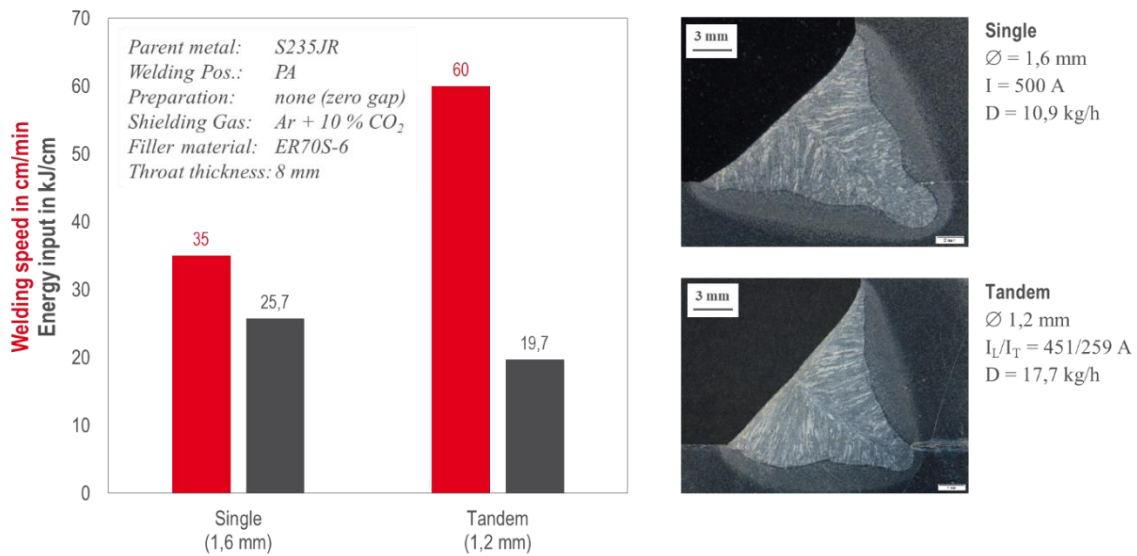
Comparing single wire with tandem welding on a fillet weld with a throat thickness of 8 mm. Both seams were welded with pulse GMAW using the process variant PMC. The tandem weld exhibits an increase of welding speed of almost a factor of two and at the same time reducing the heat input by 23 % (Note: Energy input is electrical energy, no arc efficiency is taken into account.).
